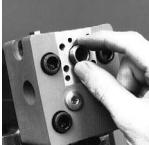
Install Pilot Fig. 50-91 - Install HC Control Pilot Piston
